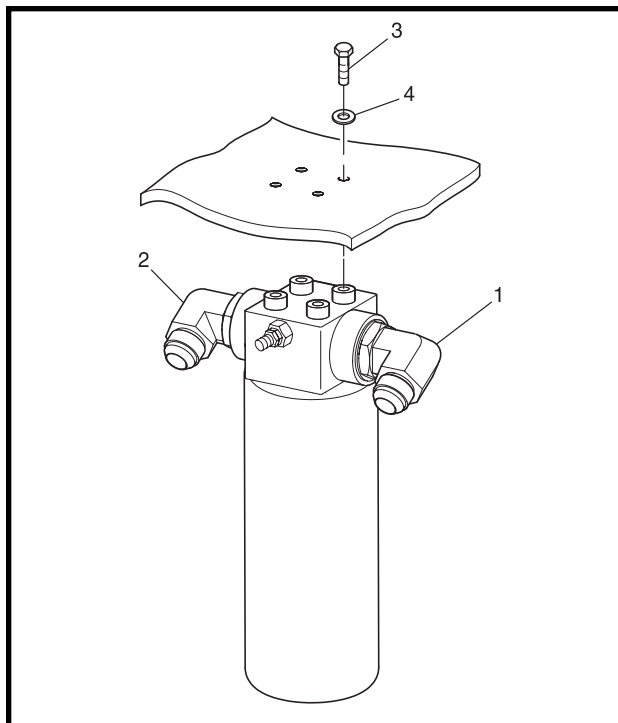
ROTOR CHARGE FILTER ASSEMBLY.
